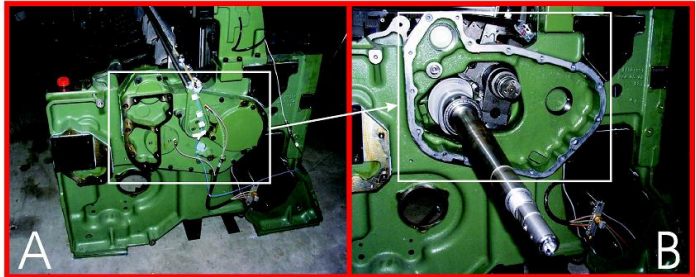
Extension of right-carter camshaft: (a) right machine carter before rebuilding. (b) right machine carter after rebuilding: the sley conjugate cams and the sley follower are clearly visible.
